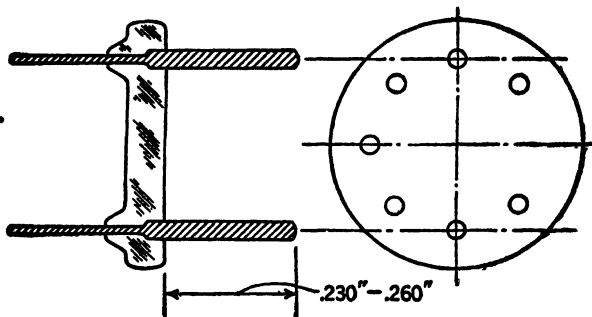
Base for Device, Assembled from Pin Inserts and Glass Button
